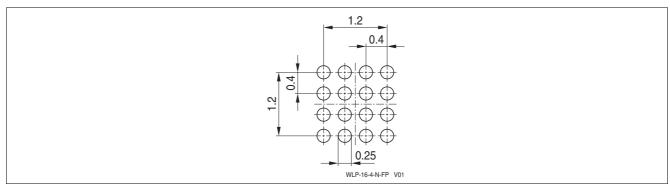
Recommended PCB pad design for reflow soldering (dimensions in mm)
